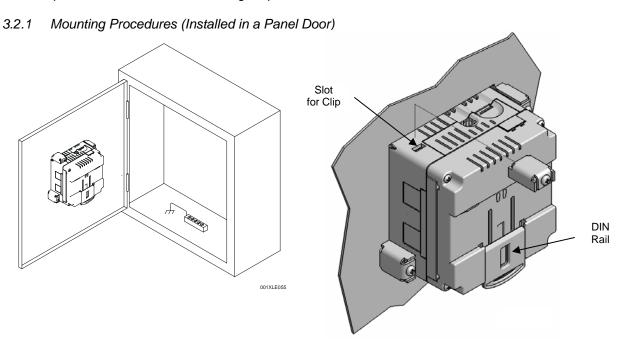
Panel Mounting of the XLe/XLt and Close-up View of Back
